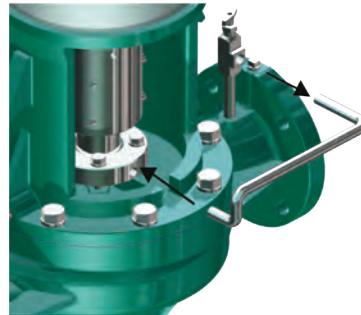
Connecting the valve and venting hose to the mechanical seal.
